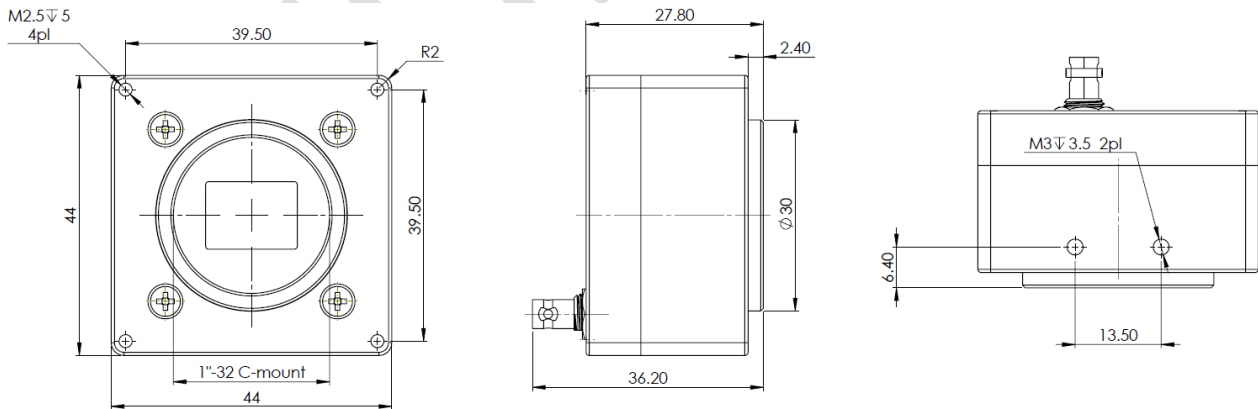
Iron CoaXPress with pane-tilt correction mechanical dimensions
